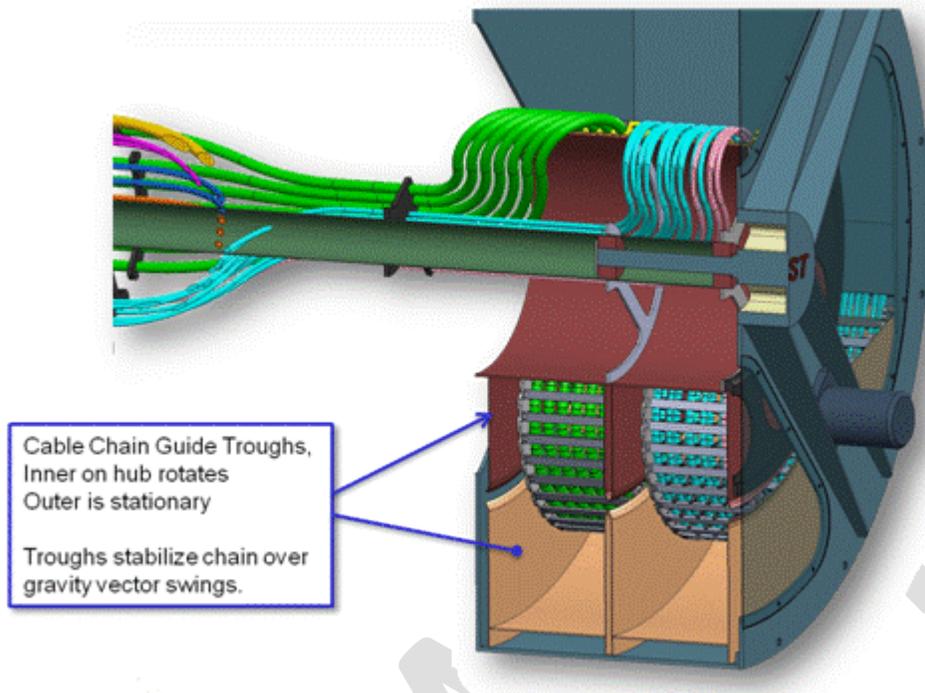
Section View of Camera Cable Wrap.
